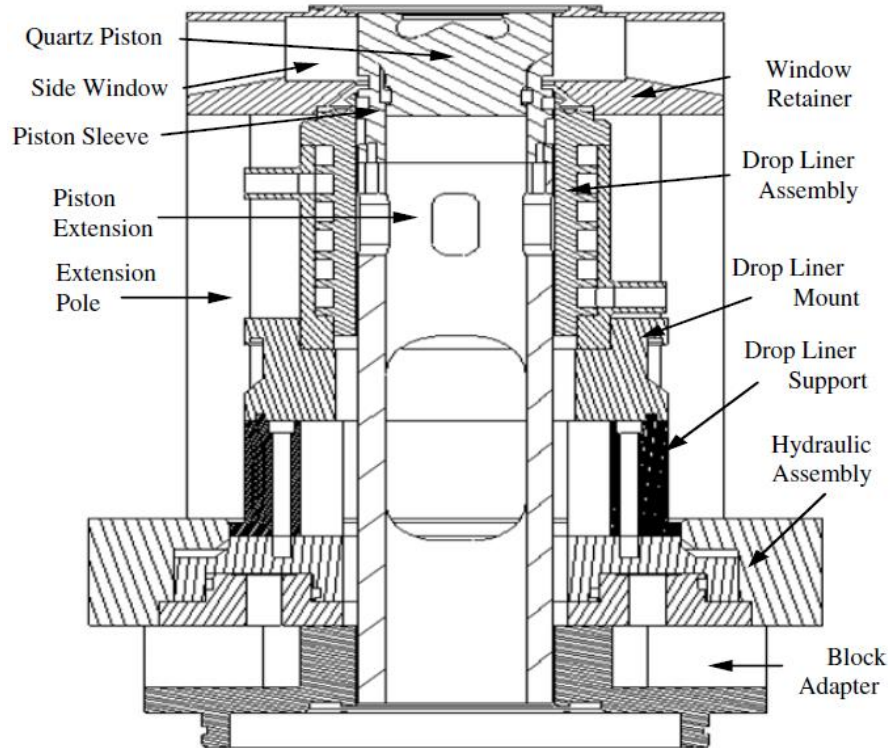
Engine Assembly Cross-section of the DIATA optical engine [164]
